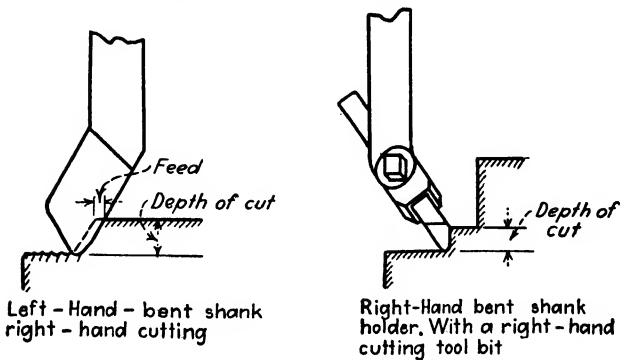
Right- and left-hand bent-shank single-point tools.
